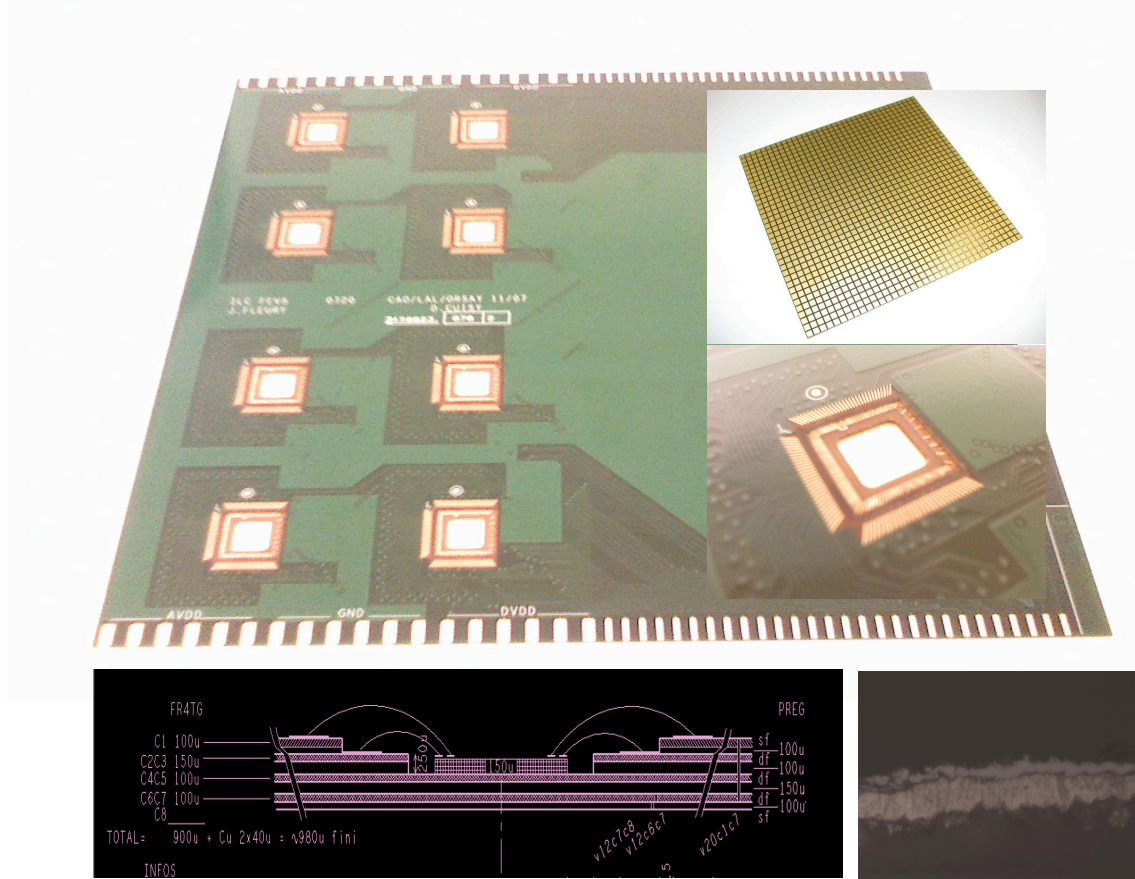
photograph of FEV5. This Front End Board which matches EUDET dimensions can accommodate 4 wafers of $9 \times 9 \text{ cm}^2$ with 324 channels each. One wafer is readout by 4 HARDROC chips which are bonded in a cavity inside the PCB. This allows the total thickness of the PCB and its readout electronics to remain around 1 mm. The bottom right metallurgical curve shows that the gold plating was too thin to allow proper chip bonding on this PCB.
